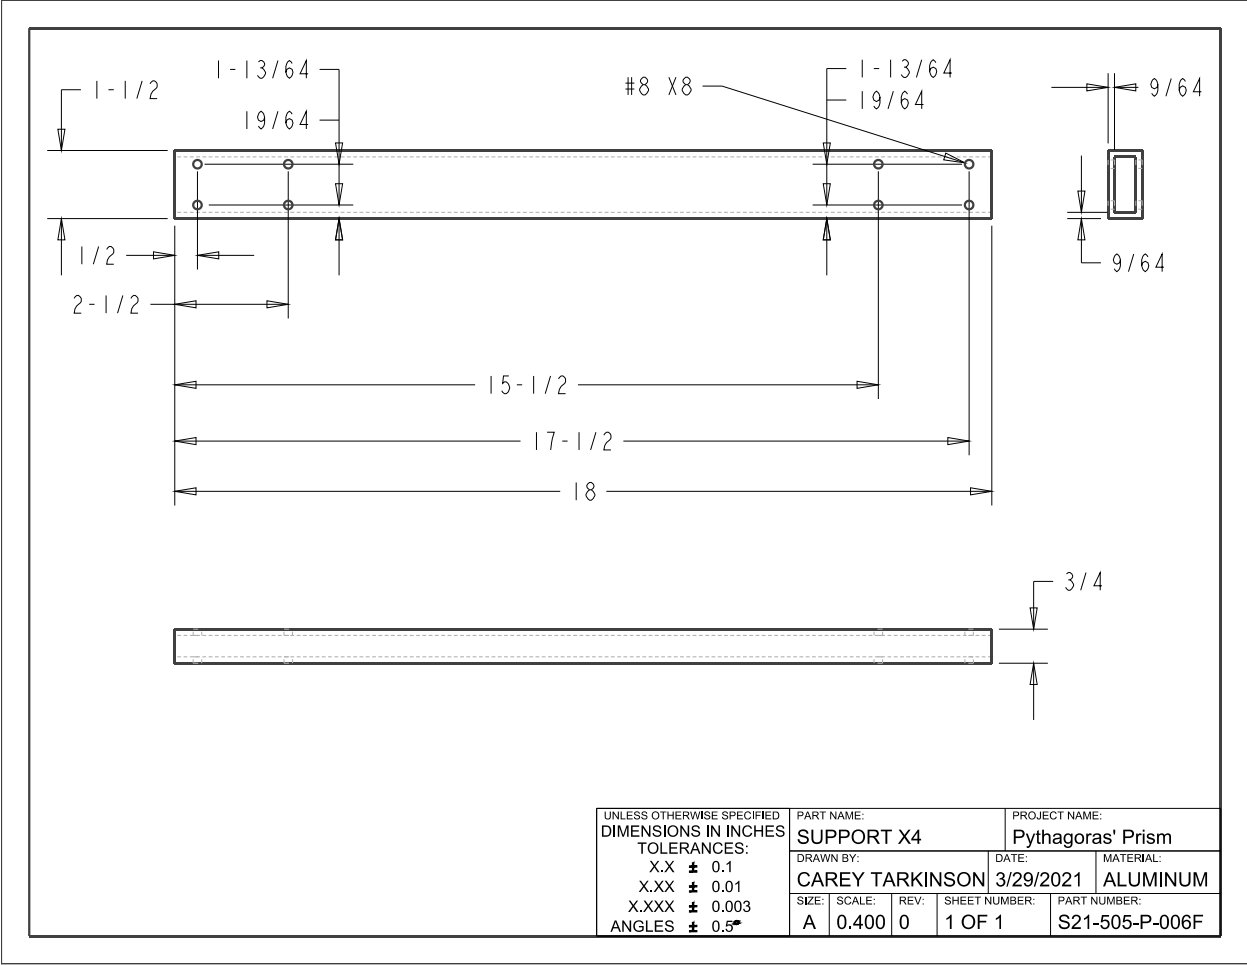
Engineering drawing of support tubes with dimensions for machining.
